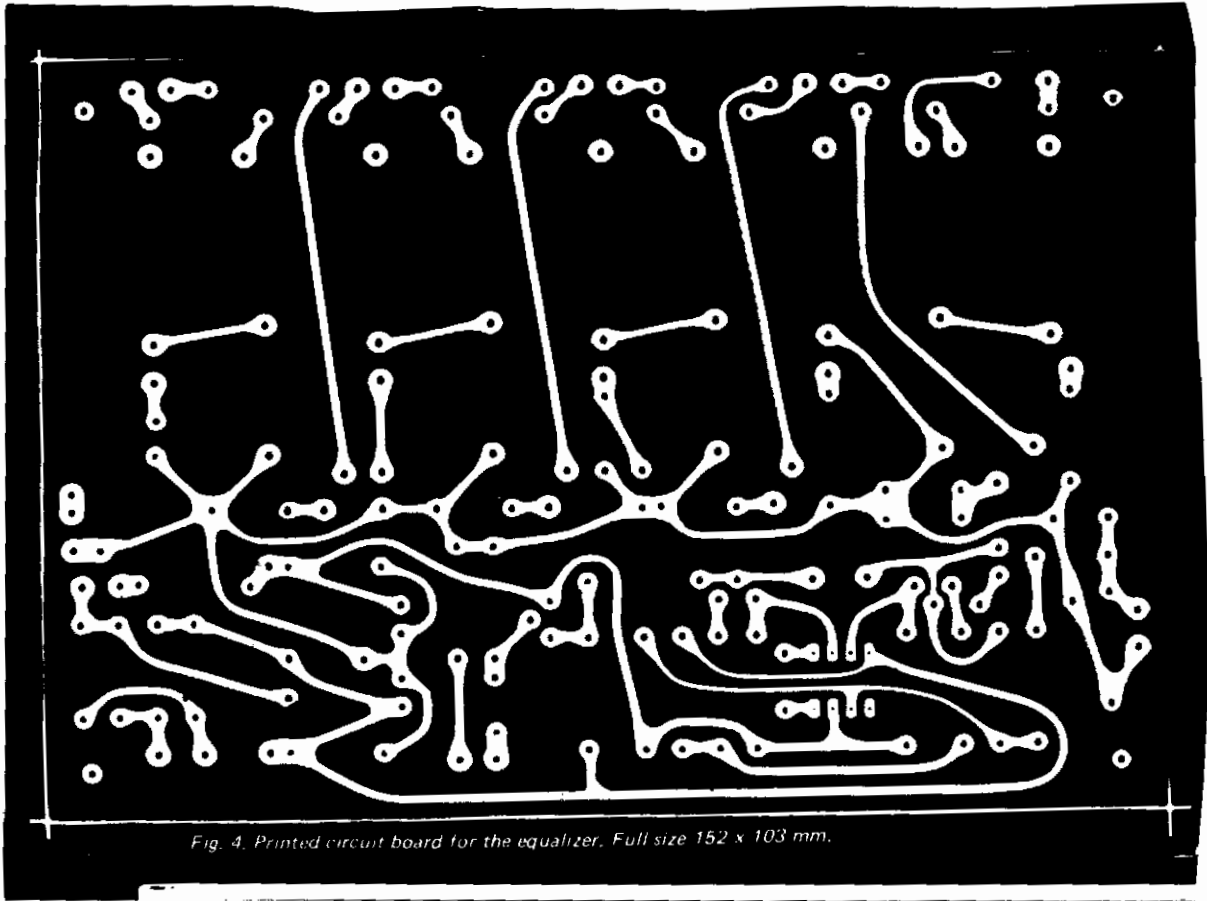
Printed circuit board for the equalizer. Full size 152 x 103 mm.
